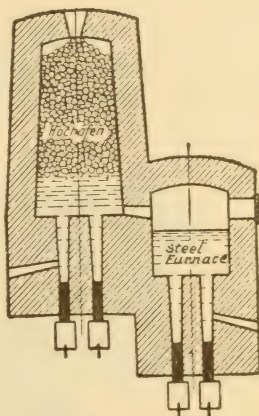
HERING COMBINED ORE REDUCING AND STEEL FURNACE.
